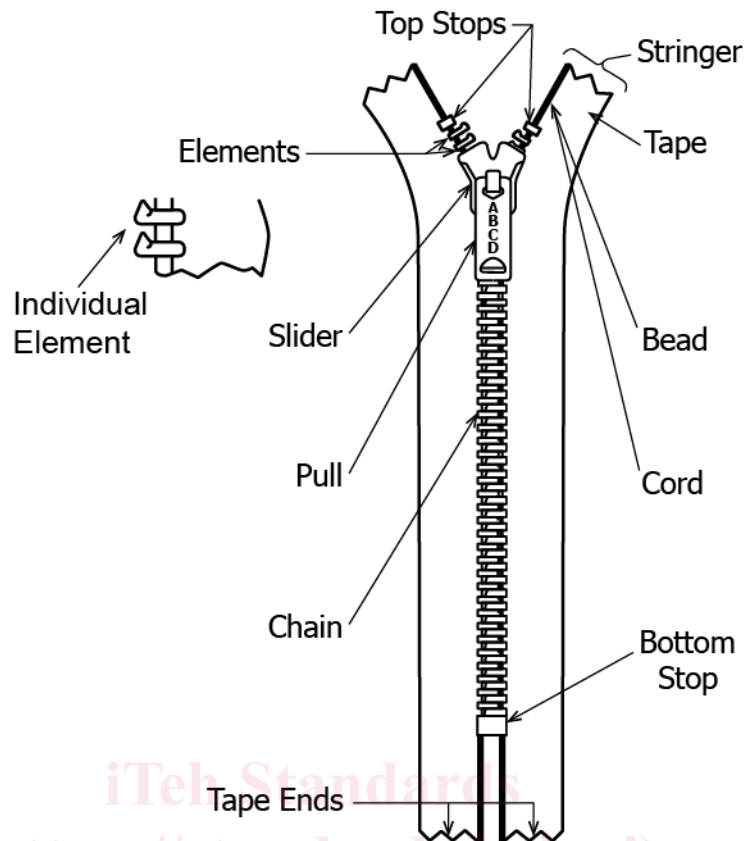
Principal Parts of Slide Fasteners – Individual Element Slide Fasteners
